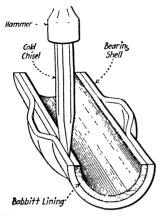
Removing the babbitt lining from a split-type bearing, using a cold chisel and hammer.
